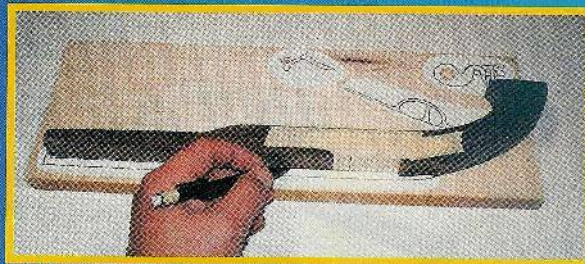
Position the lock and stock on the barrel and trace an accurate cut line.
